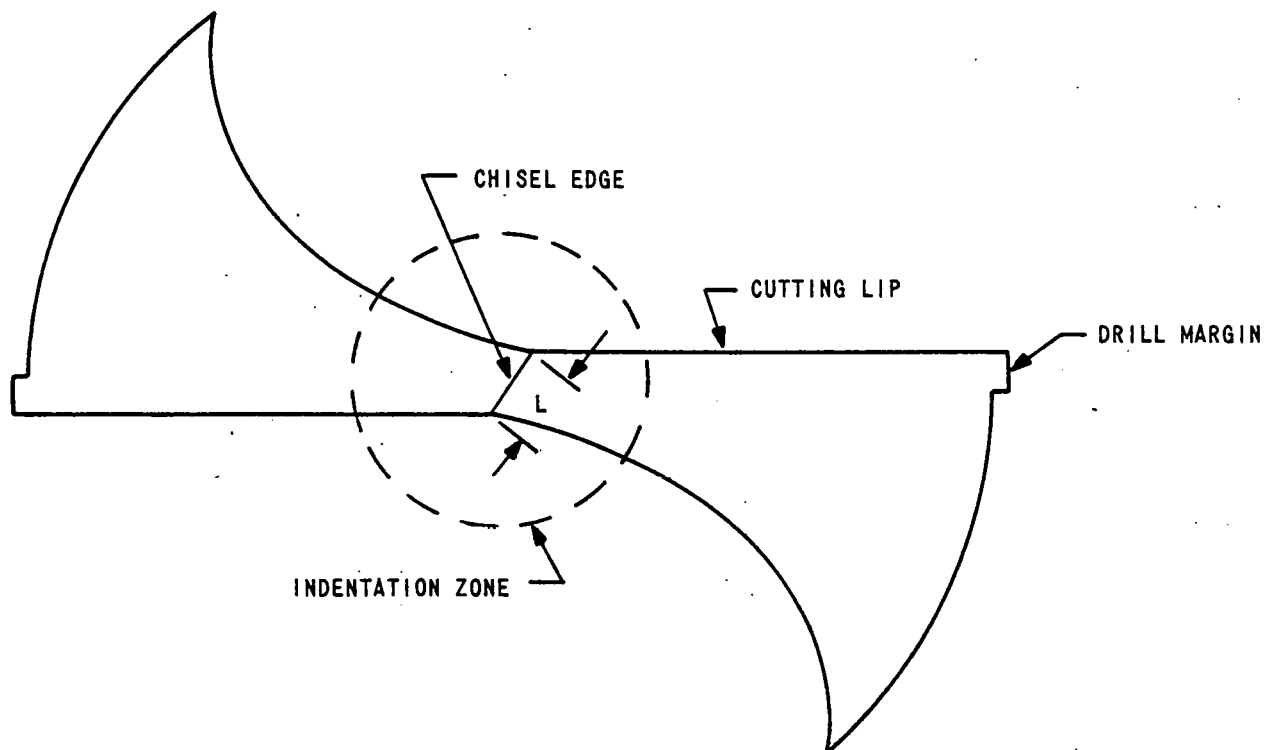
Zone of Contact Between Drill-Point Surfaces and Workpiece
